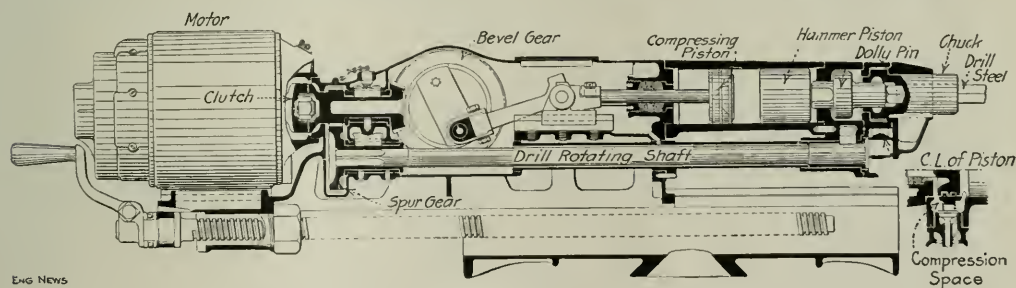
SECTION THROUGH ELECTRIC AIR-HAMMER DRILL
